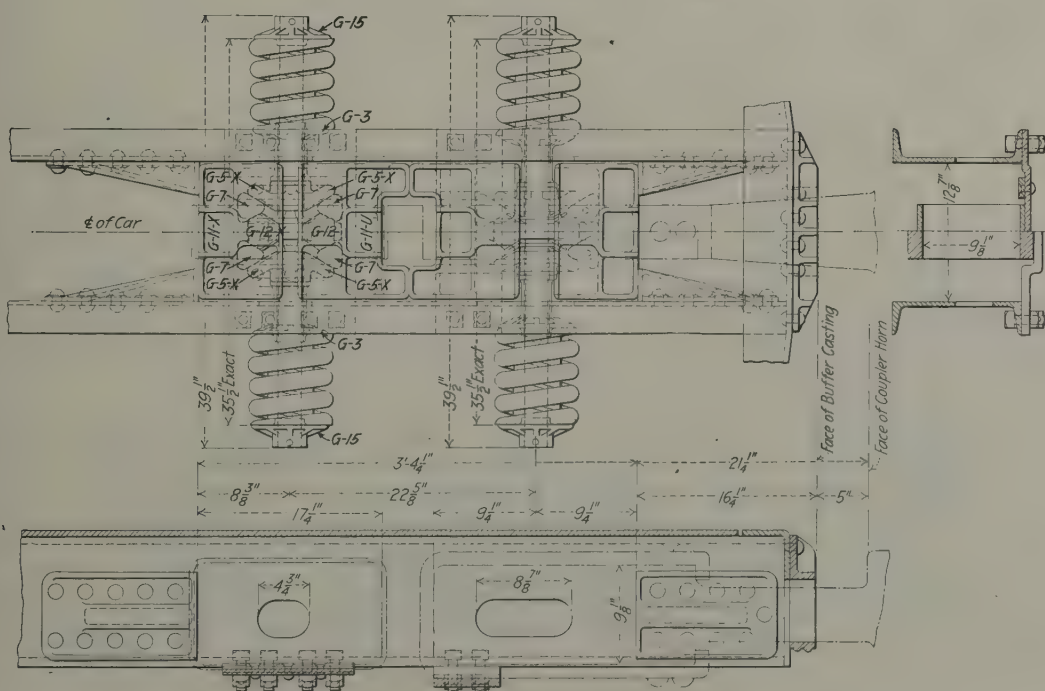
Cardwell Friction Draft Gear Type G Class 11-A: Union Draft Gear Company.
